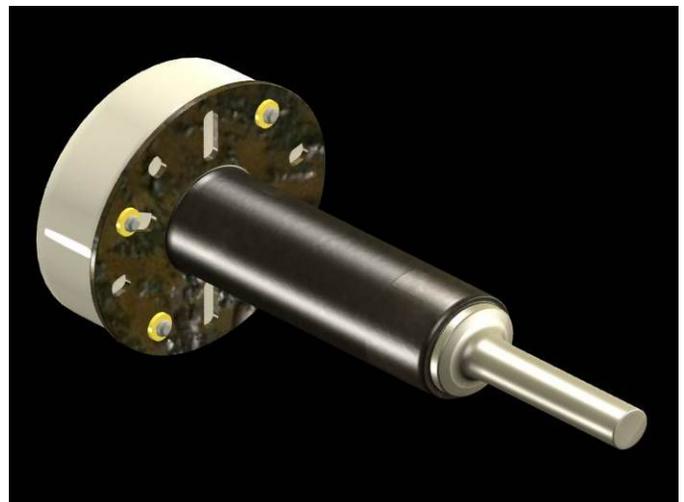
The plastic magnetic fixture attached to spindle and shown above.
